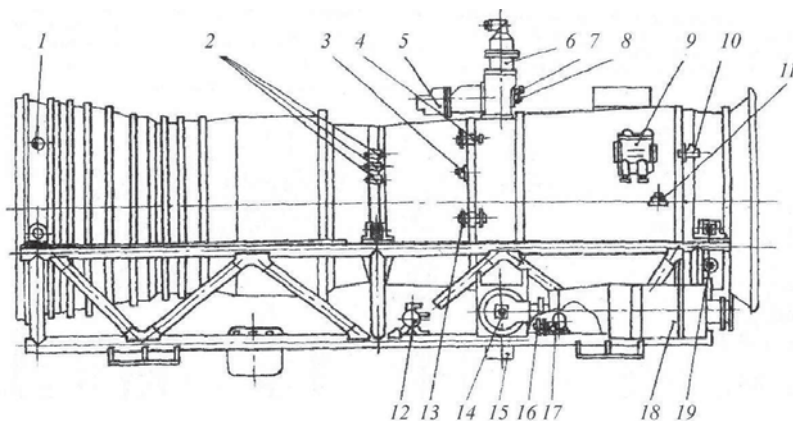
Location of the D050 engine and auxiliary mechanisms on the frame (right side view) [15]:
